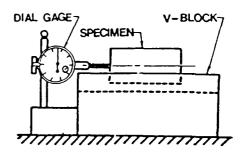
Assembly for Determining the Flatness and Perpendicularity of End Surfaces to the Specimen Axis
